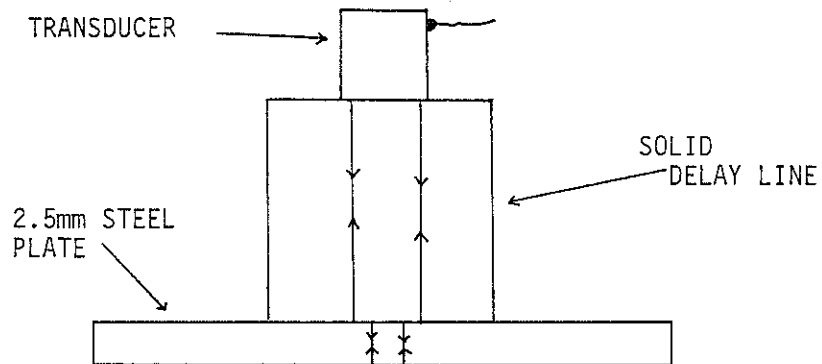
Solid delay line contact method illustrated on 2.5mm steel plate.
